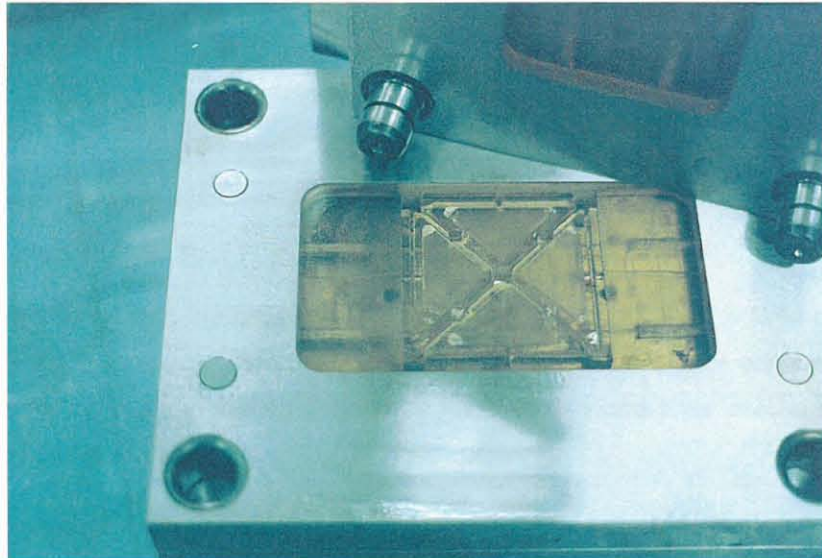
User Part Cavity Insert Showing Signs of Chipping
